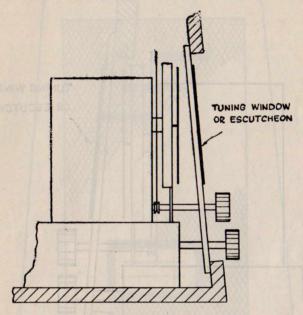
Fitting a new Control Panel, Recessed Type.
